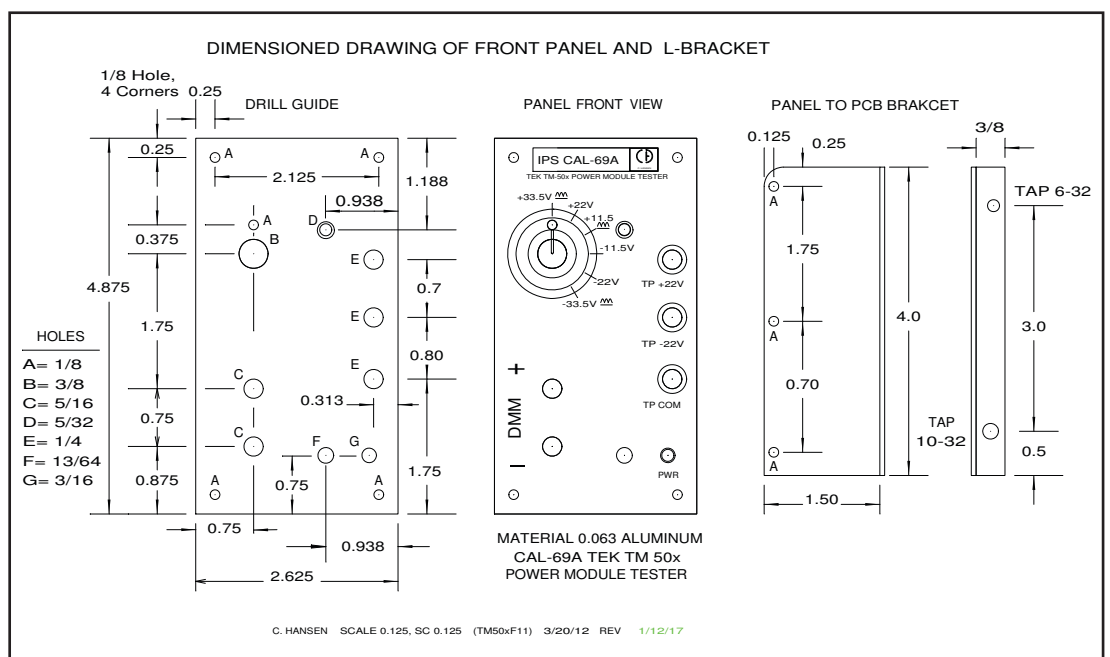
This is a dimensioned drawing of the two aluminum panels (the front panel and the L-bracket).
